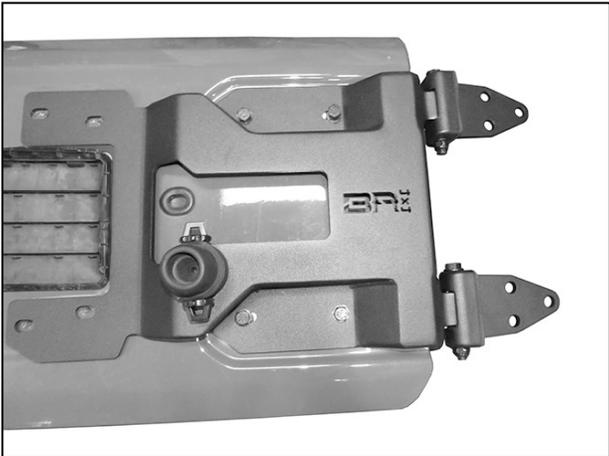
Attach "Short" rubber bumper Relocation Cup and Mount to hole in Door Reinforcement
